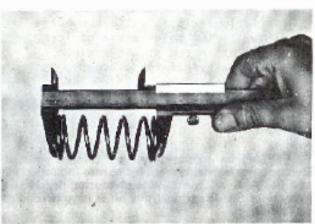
Check the fatigue or wear factor of the clutch pulley spring.
